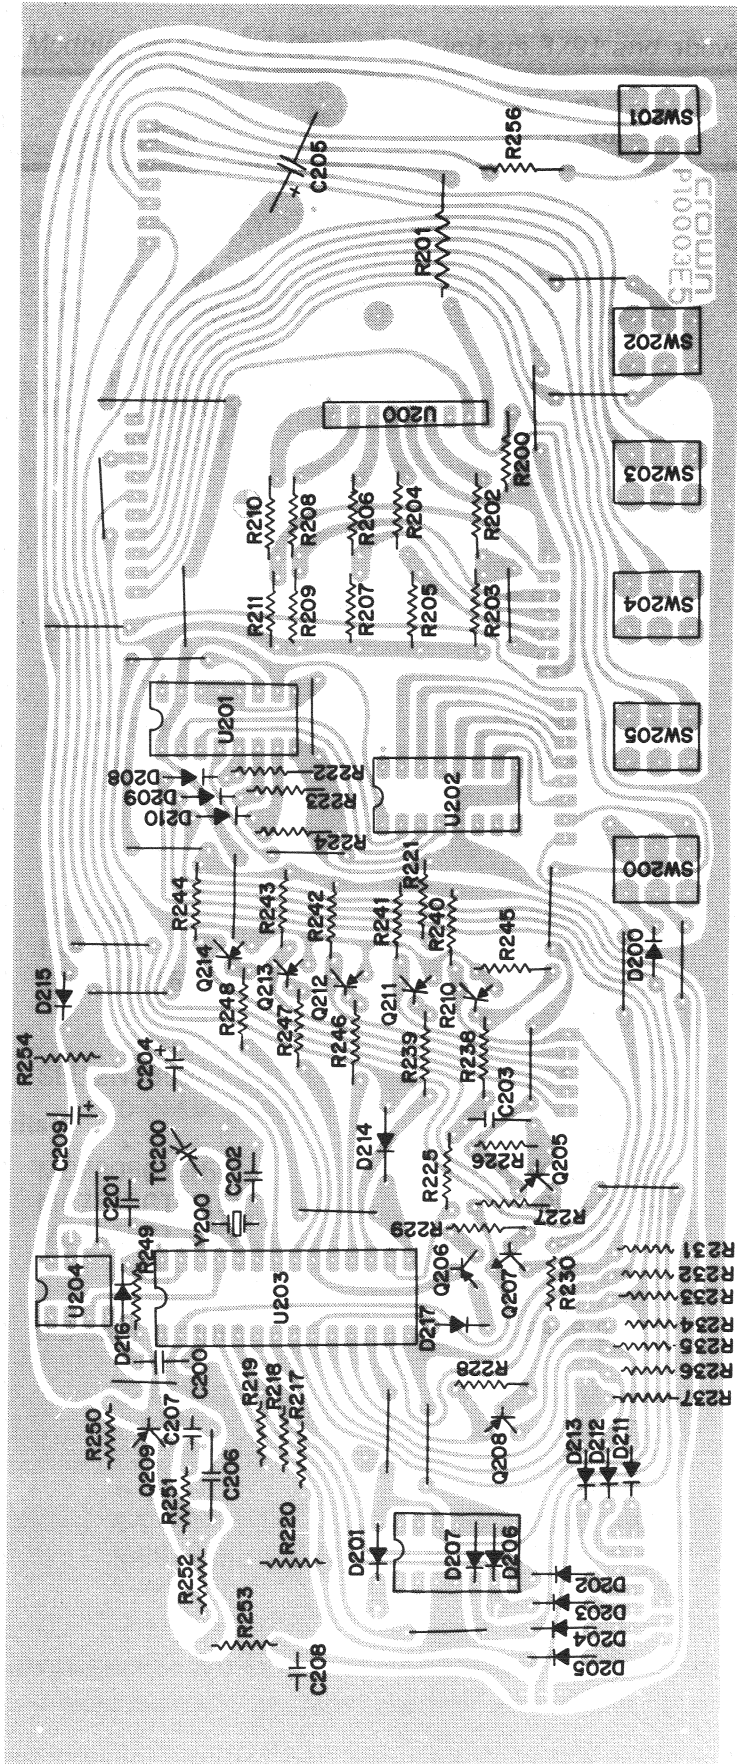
Control Module Foil Board Layout; #Q42498-8
